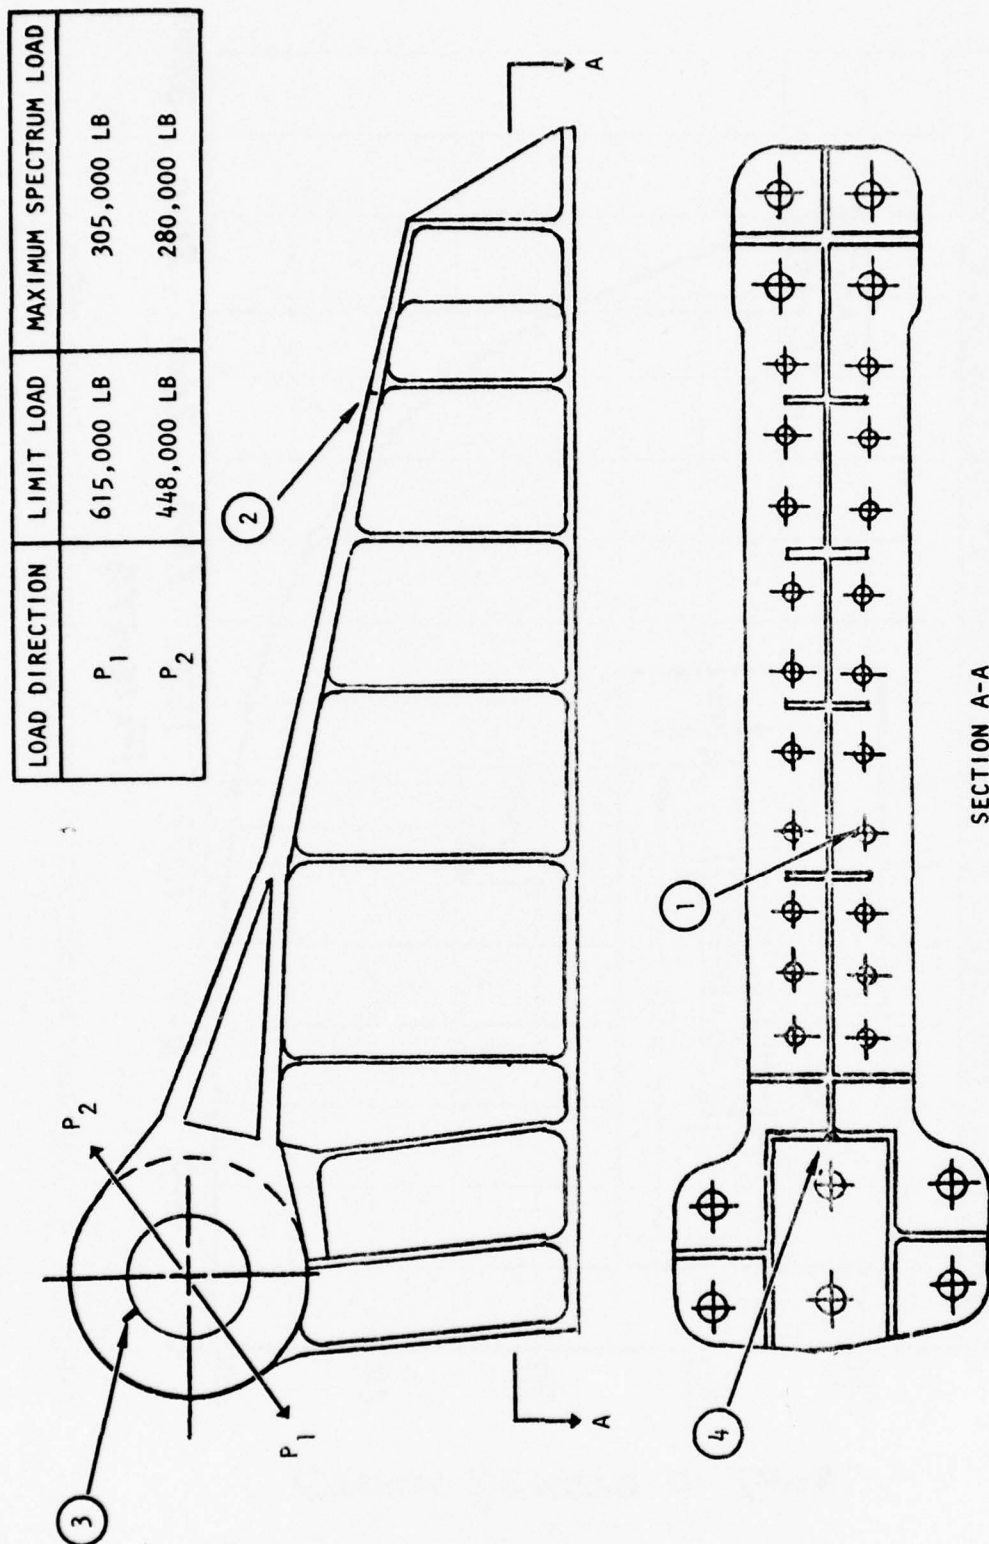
Areas of Fatigue and Damage Tolerance Analysis - Wing Sweep Actuator Attach Fitting
